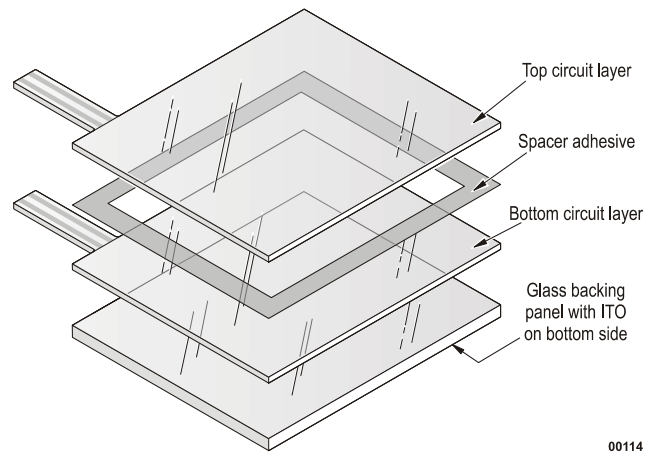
Location 4 - ITO on the bottom side of the backing panel
